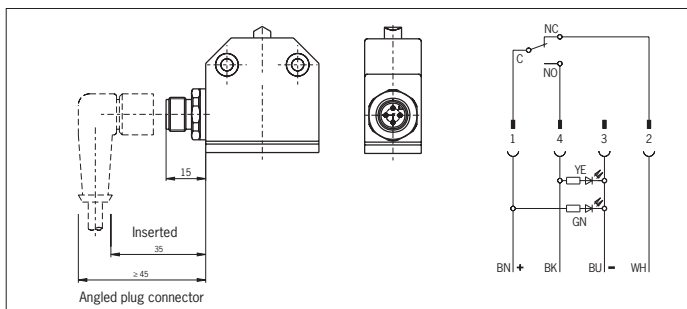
Dimension drawing/connection diagram N01.550C1526 with plug connector M12 (4-pin)
